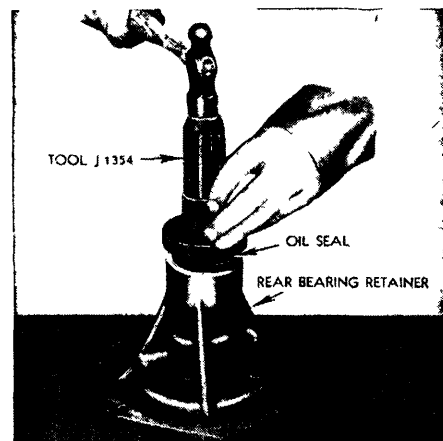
Install rear bearing retainer seal. Slide retainer over output shaft and line up attaching bolts in retainer with bolt holes in reverse internal gear support. Tap home using in place. Dip threads of attaching bolts with copper washers in sealing compound, start bolts and tighten finger tight. Final tightening is done with retainer in case. Install speedometer driven gear and sleeve
